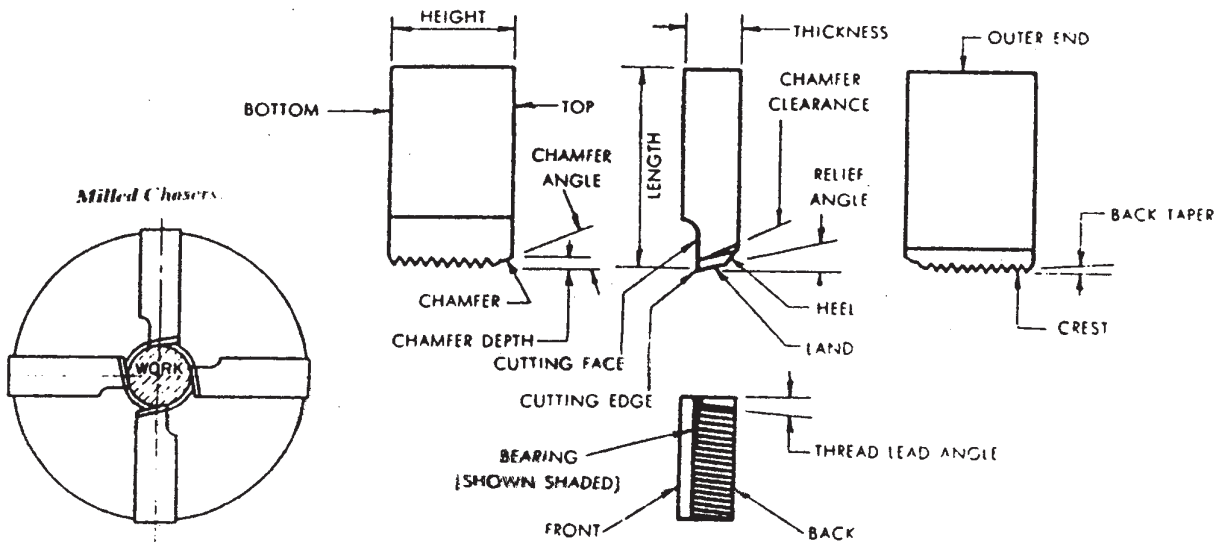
Die head chasers, blade type, milled (R H shown)
